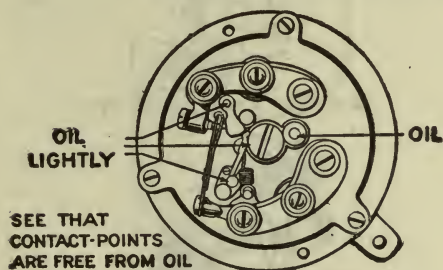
View of contact maker showing places to be oiled.—Type K2.
